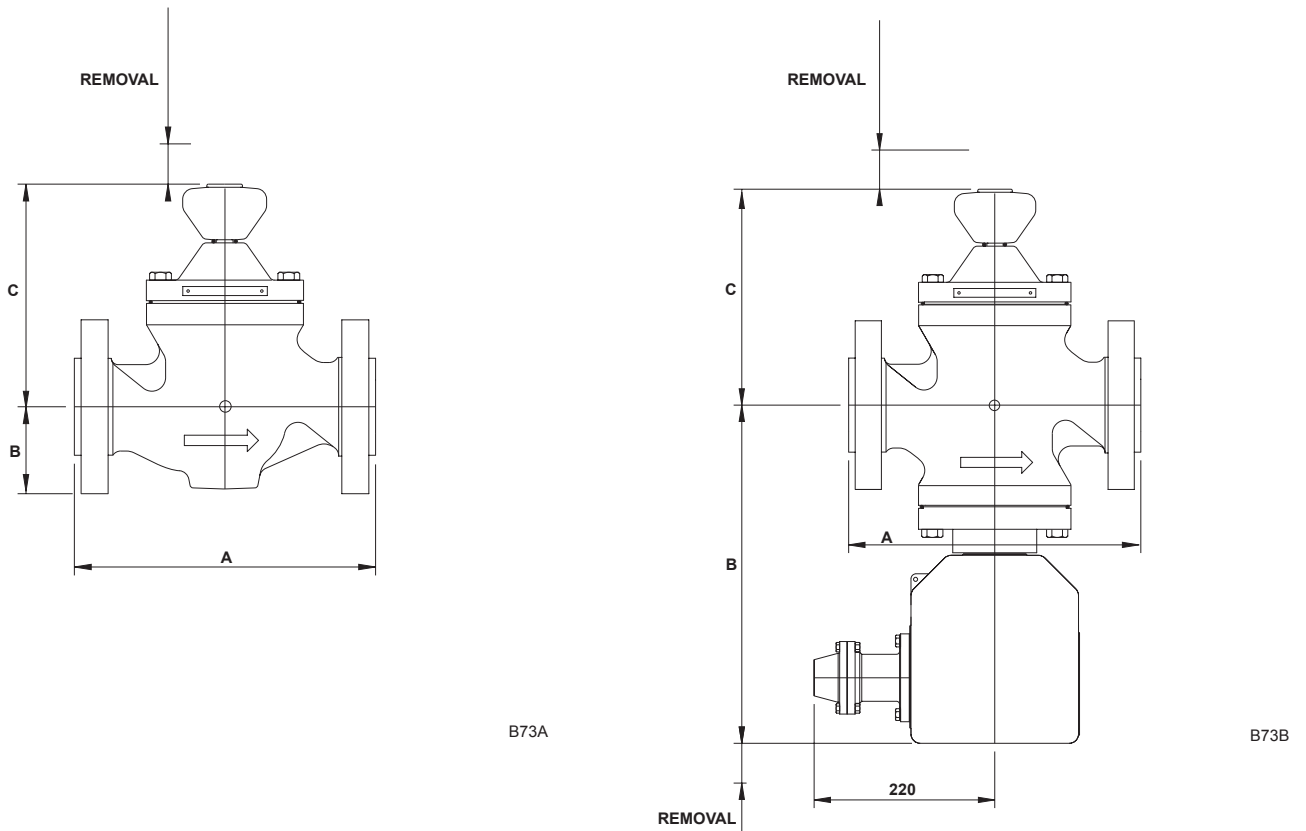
Types BLE and BLX Trottle Valve Dimensions
